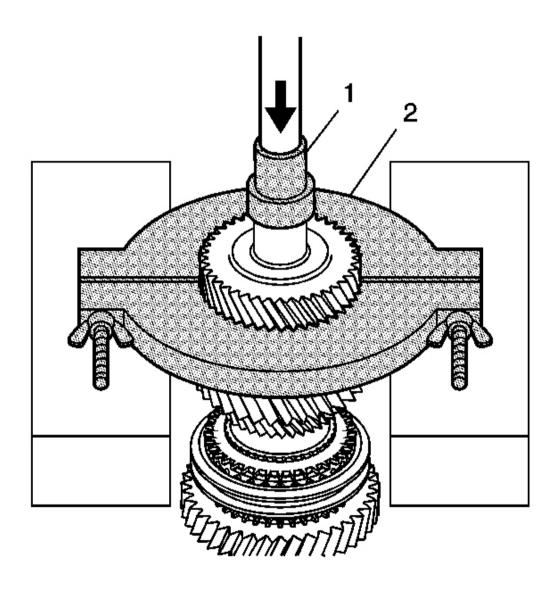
Pressing Off 4th Driven Gear Courtesy of GENERAL MOTORS CORP.
